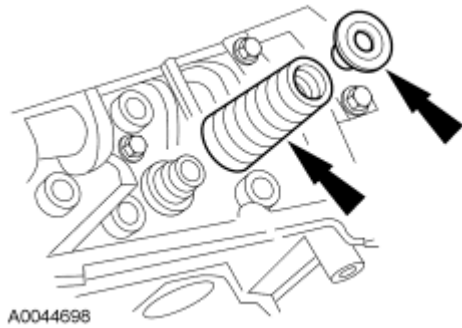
Identifying Valve, Valve Spring & Spring Retainer
